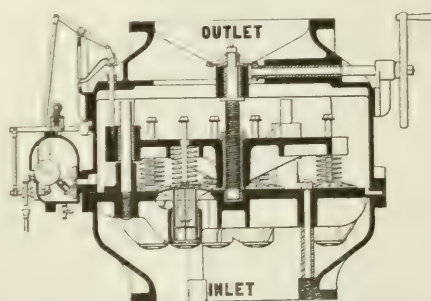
ARRANGEMENT OF VALVE FOR VACUUM SERVICE, SHOWING TRAP-CONTROLLED WATER SEAL
